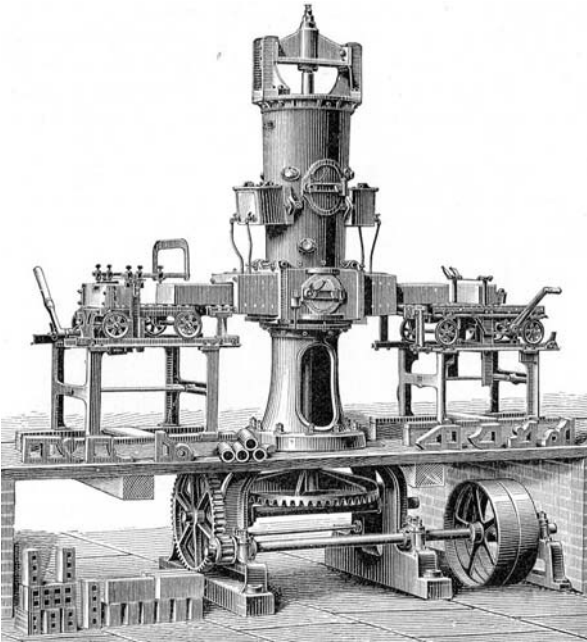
Upright auger extruder with bottom drive using transmission and steam engine
